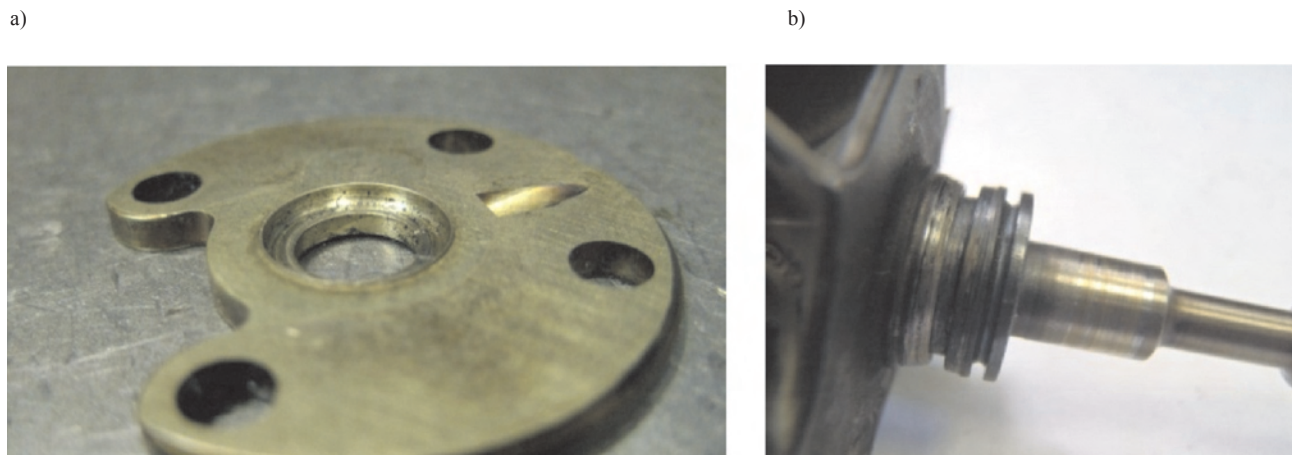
Turbocharger component damage caused by oil pressure drop: a) permanent deformations, scratches around the bearings, b) overheated rotor shaft
